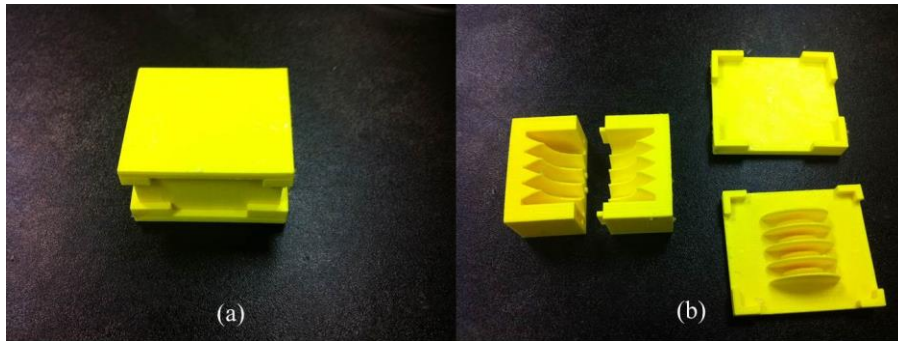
Mold V1 for Extension Mechanism V1, (a) Assembled Mold; (b) Separated Mold Pieces
